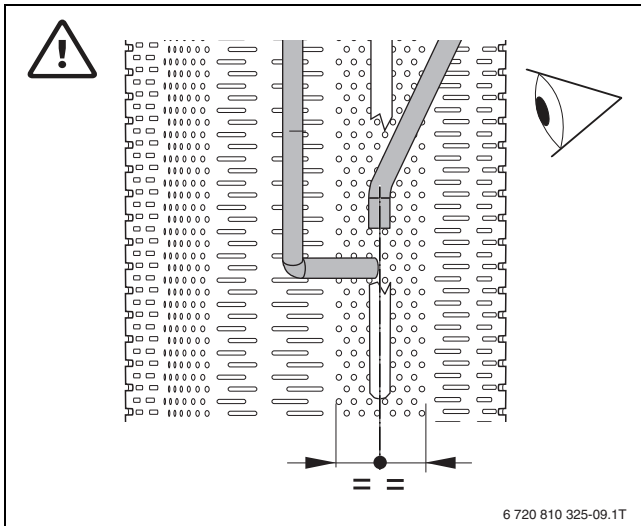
Visual inspection of the electrode position using the hole pattern
